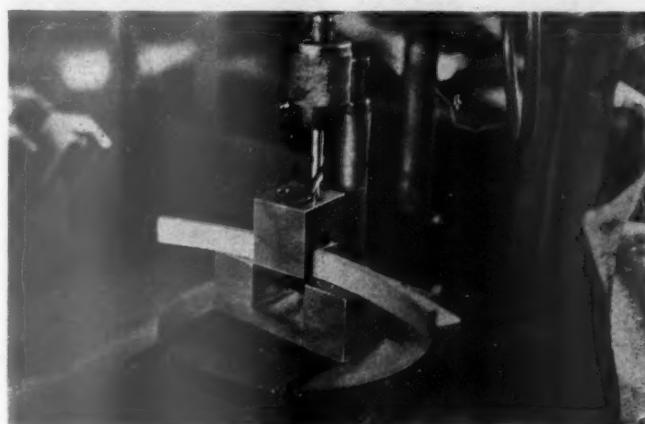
In order to provide the lap joints a short section of the plain ring is cut off and riveted to the L-ring—Here is the drill jig that locates the rivet holes
